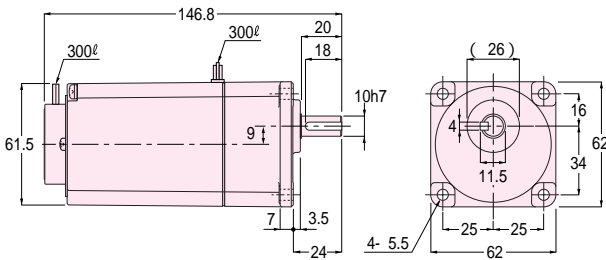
LGU-10^M_B-3 ~ 200-S06
